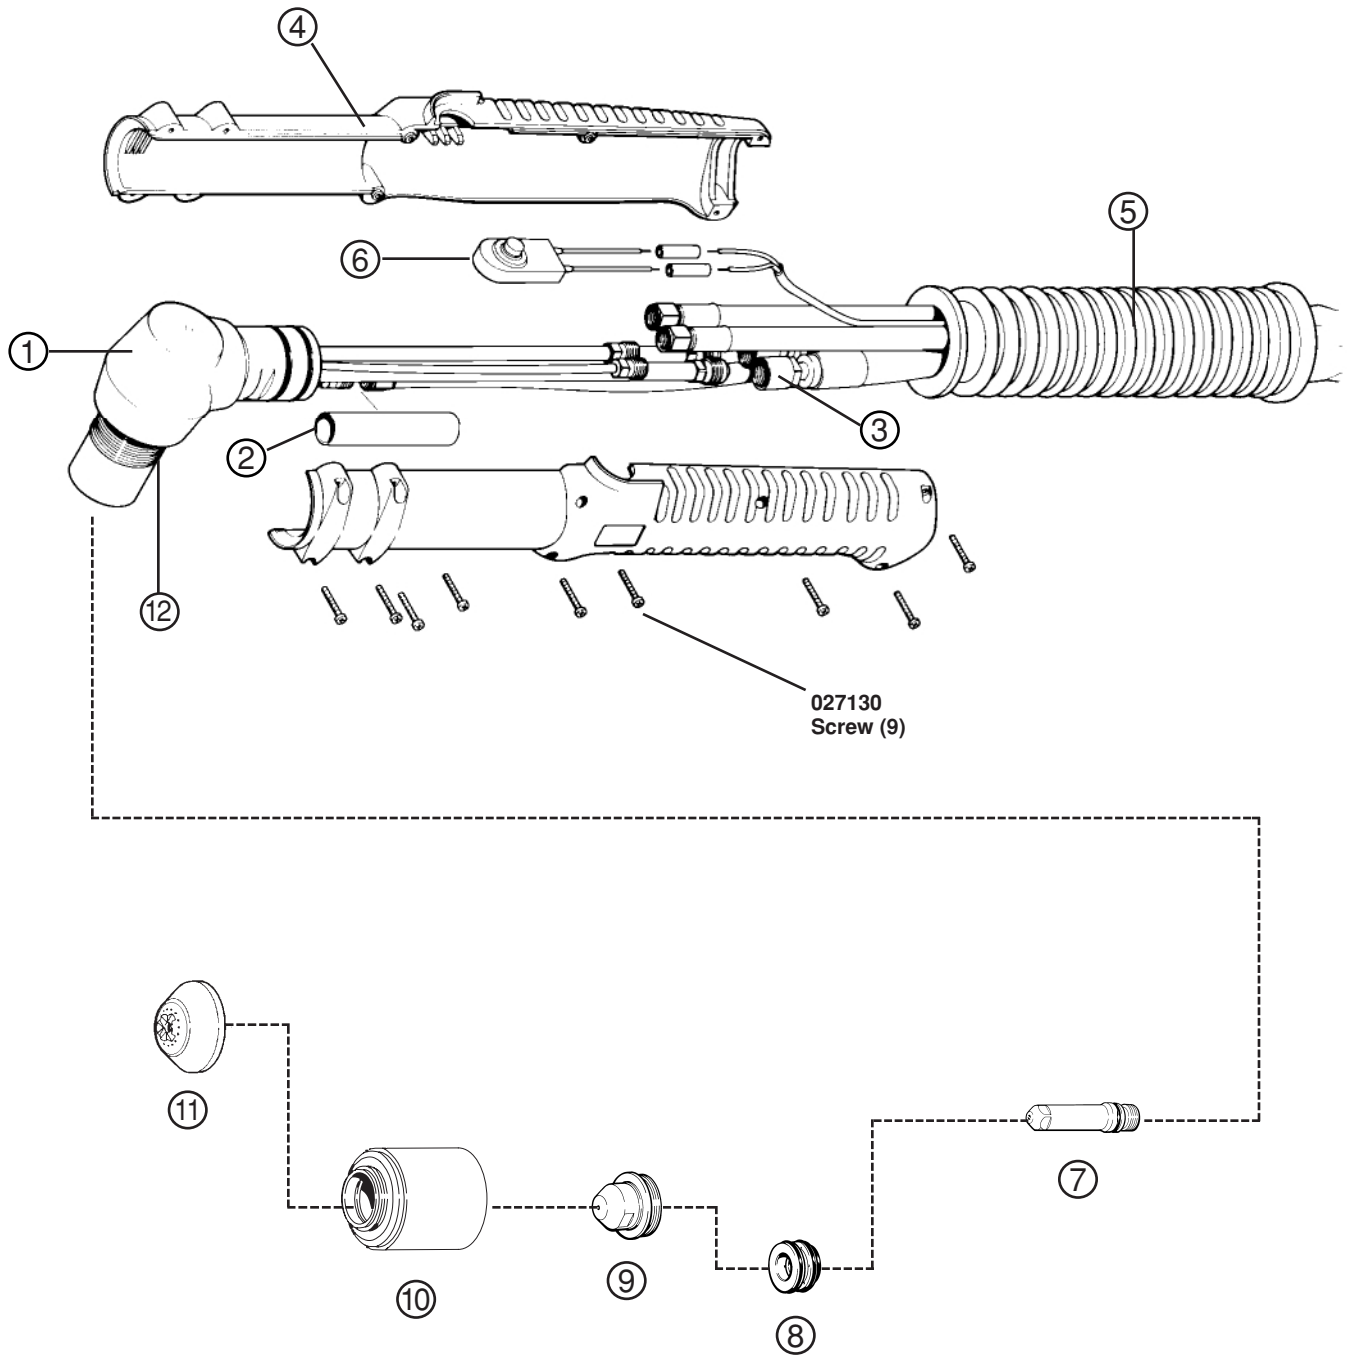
MAX200 Rev 1 Hand Torch Assembly
